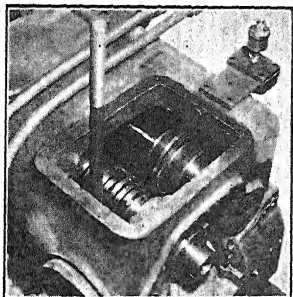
A View of the Work Head of the Landis Camshaft Grinder with the Cover Removed to Show the Master Cams and Roller.
